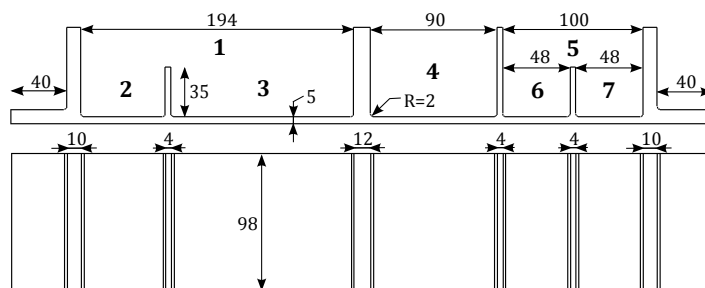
The geometry of the part (in mm) and its seven machining features
